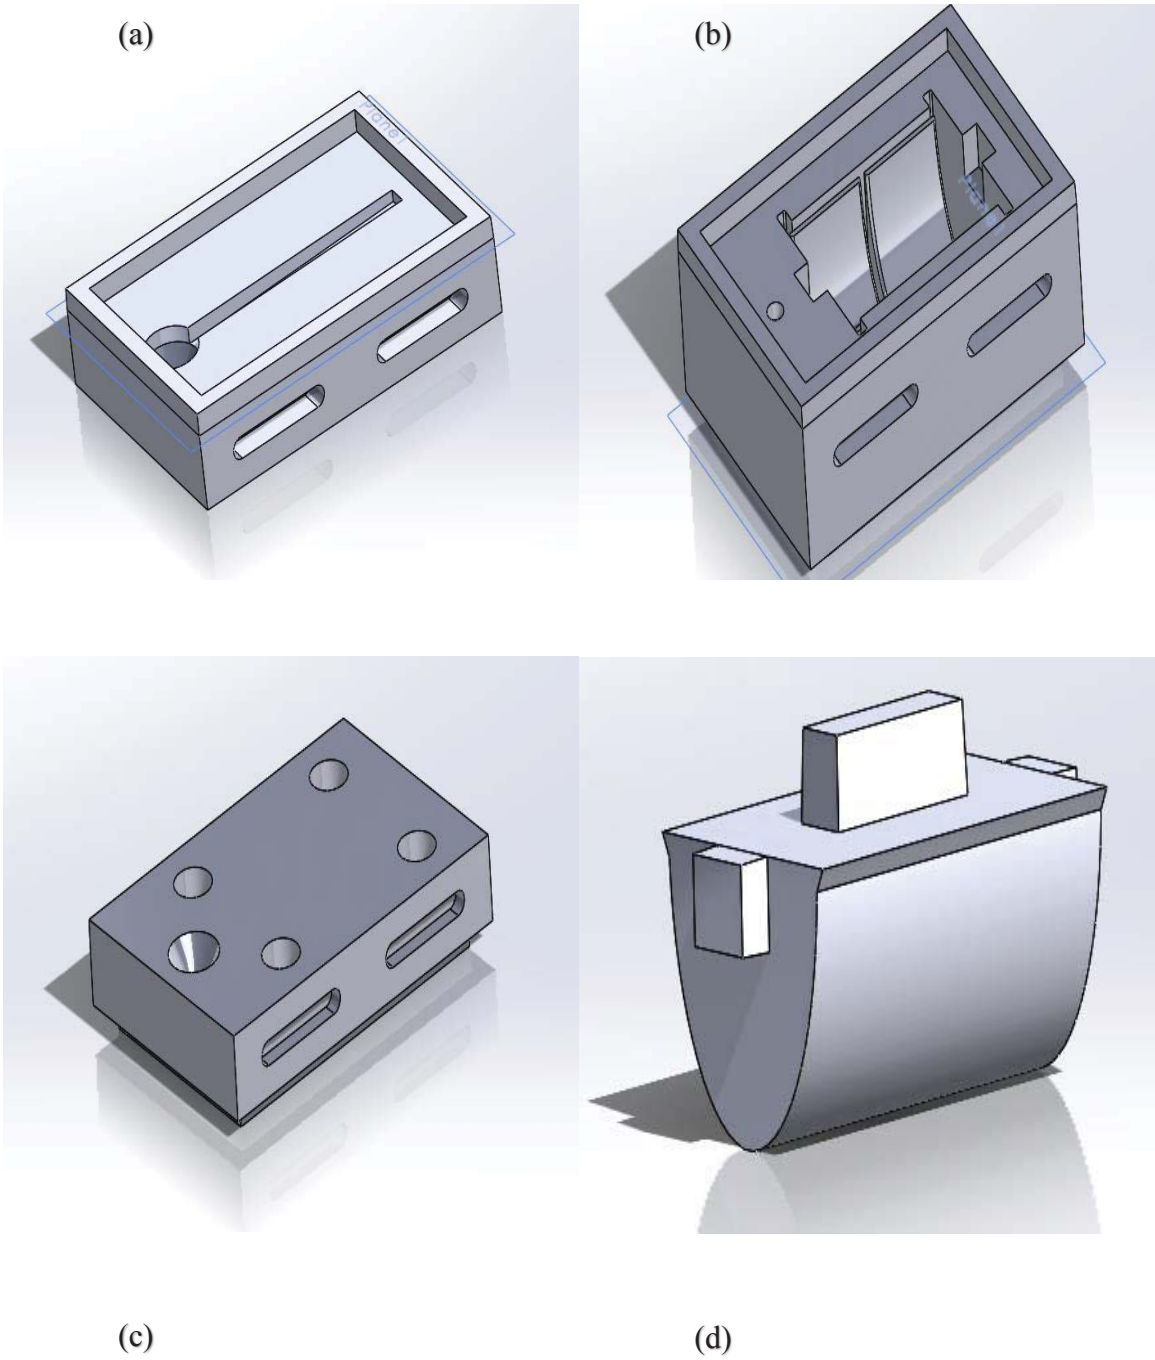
CAD drawings of the individual components for the total casting assembly: a) bottom drag section, b) middle cavity section, c) top section containing risers and sprue, and d) mold core.
